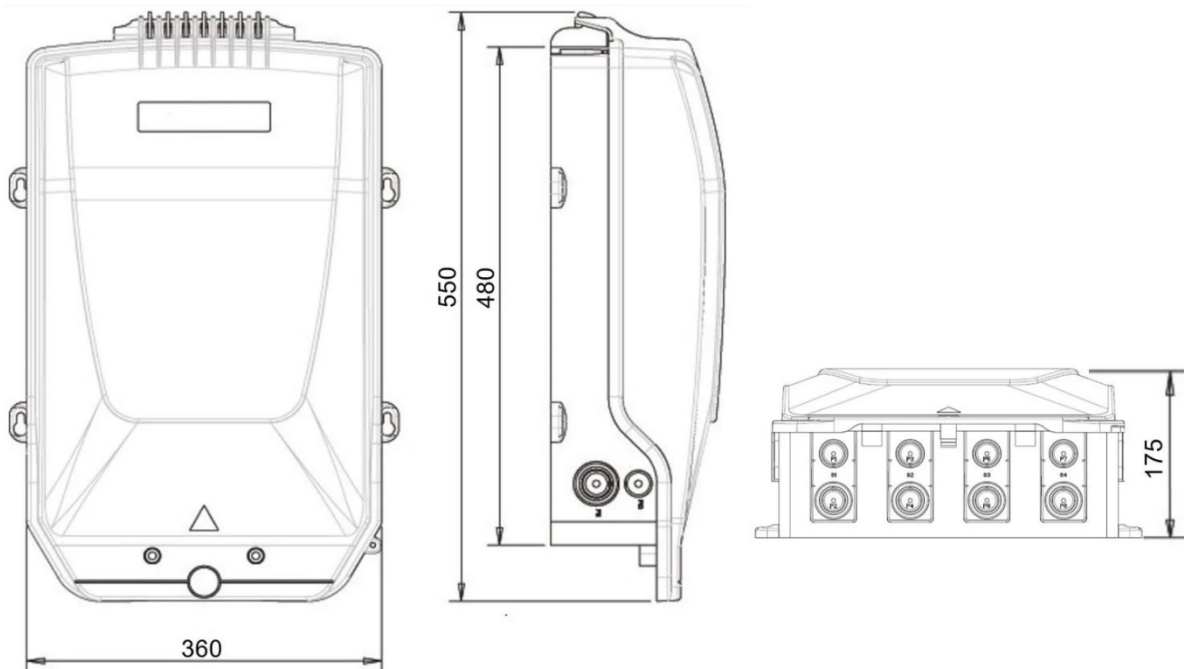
BUDI Customer Connection Box Dimensions (in mm)
